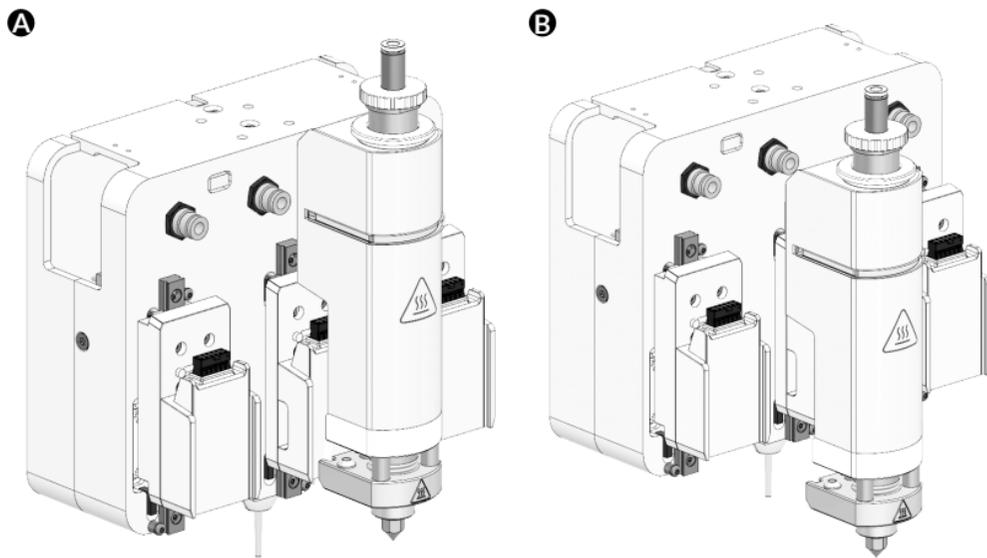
Attaching the Thermoplastic Printhead to the BIO X. (A) Line up the printhead with a mount on the printbox. (B) Slide the printhead down with one hand and secure the bottom of the printhead mount with the other hand. Once attached, the lights on the printhead will turn from white to blue.
